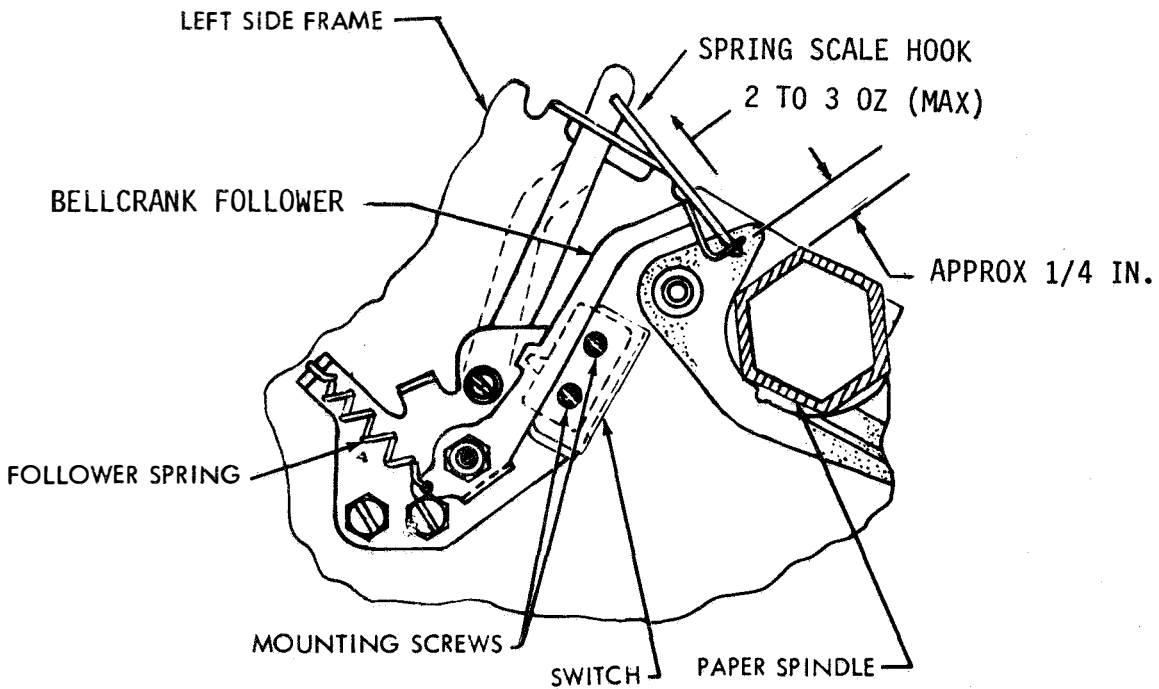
Bellcrank Follower and Bellcrank Follower Spring, Left Rear View
